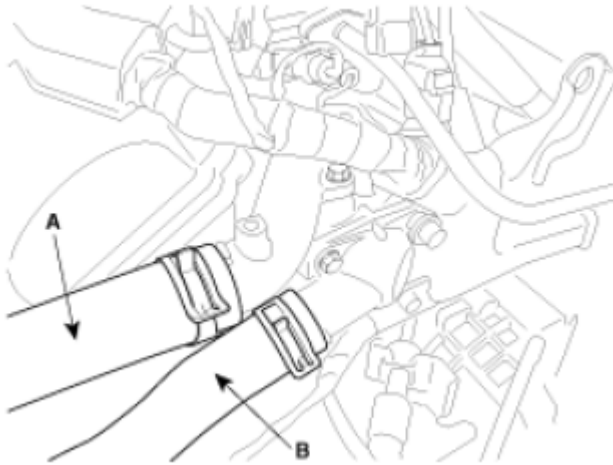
Identifying Upper Radiator Hose And Lower Radiator Hose
